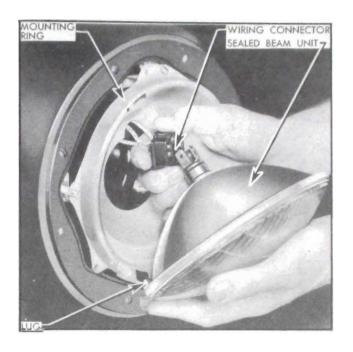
Installation of Headlamp Sealed Beam Unit
